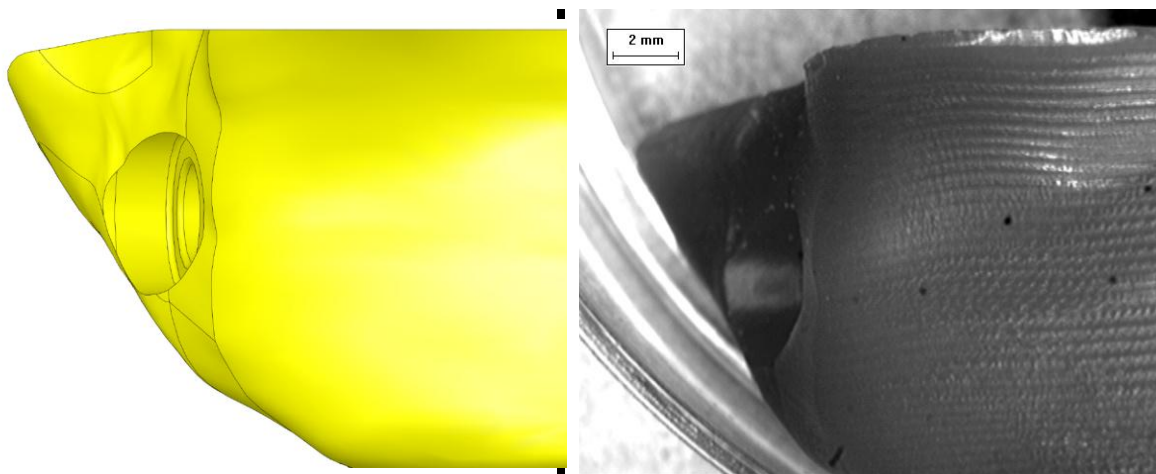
CAD and machined comparison of the side-front surface of the implant, where on left is the CAD model and on right is the machined substrate prototype from wax.
